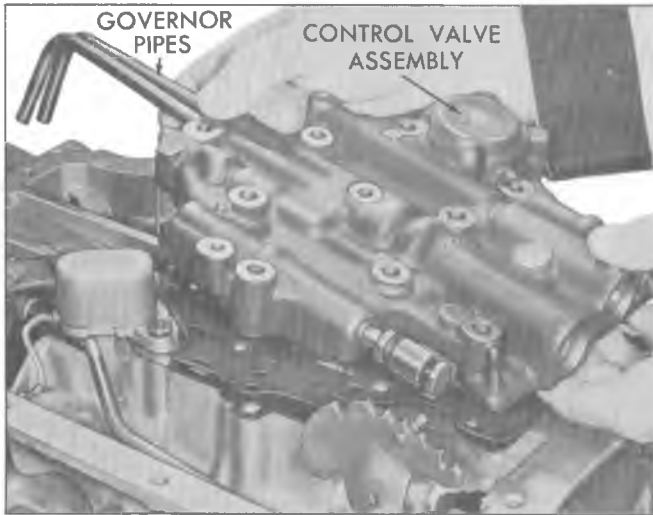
T—Removing Control Valve Assembly and Governor Pipe from Case
